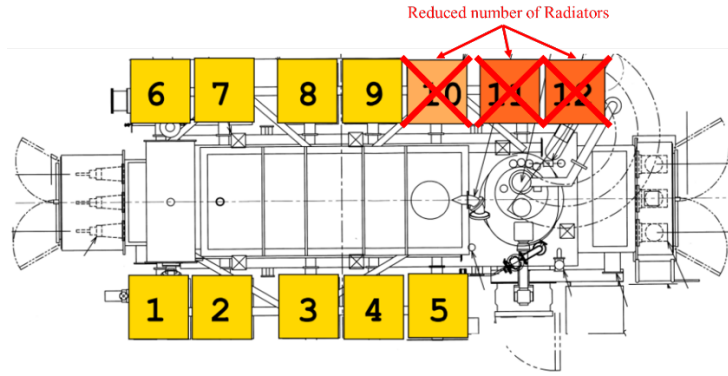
77/6.6kV 18.26MVA Radiator arrangement of rapeseed oil Transformer
